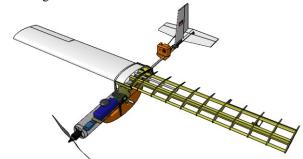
Isometric view of the final design of fixed-wing UAV □
